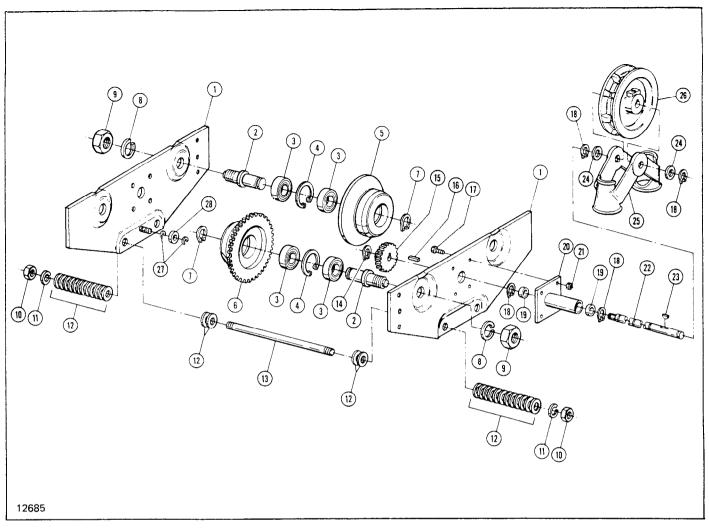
Hand Geared Rigid Mount Trolley Assembly. (4" ϕ Wheels - 3-1/8" & 5" c/c Pins.)
